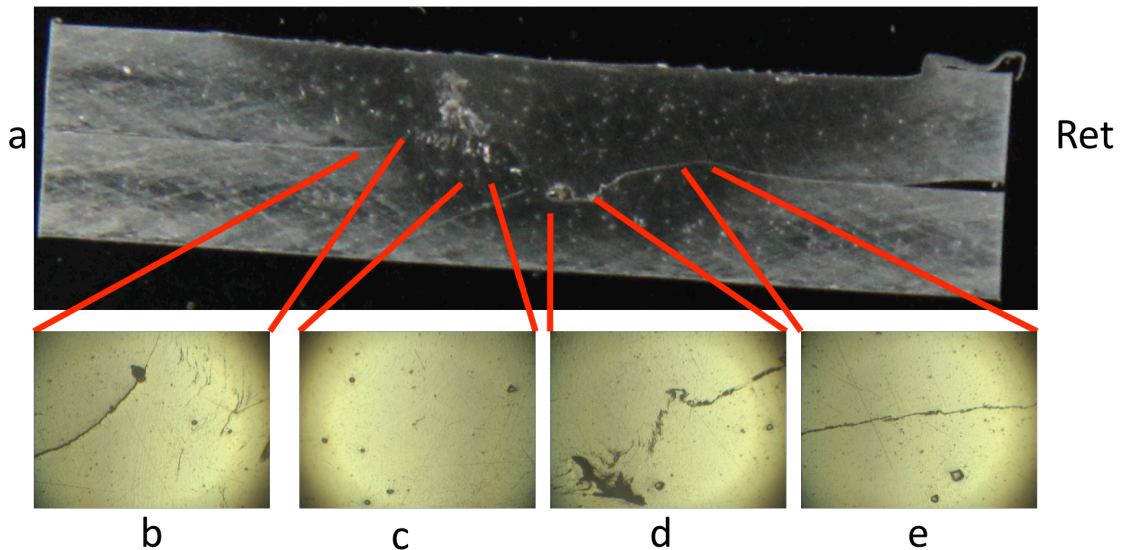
Weld 8: 21 ipm 2000 rpm 86% parent UTS, a) 1x image of weld zone, b) 10x view of the observed hooking defect (advancing), c) 10x view of the material within the welded zone d) 10x view of joint line remnant within the weld zone and volumetric weld flaw e) 10x view of joint line remnant within the weld zone
